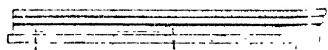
Lower Side Moulding with Fresh Piece Jointed on: Unfinished
